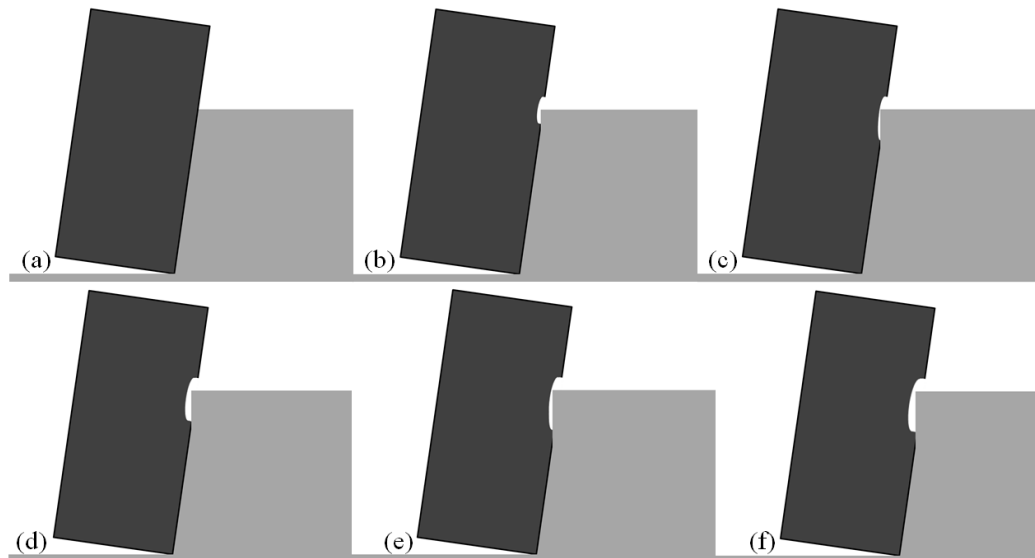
Visual representation of stair form notching (a) new tool engages in workpiece material (b) chip is formed in notch region adjacent to the workpiece surface (c) chip length is increased in order to expose material adjacent to the workpiece (d) chip depth is increased (e, f) process is repeated until tool failure
